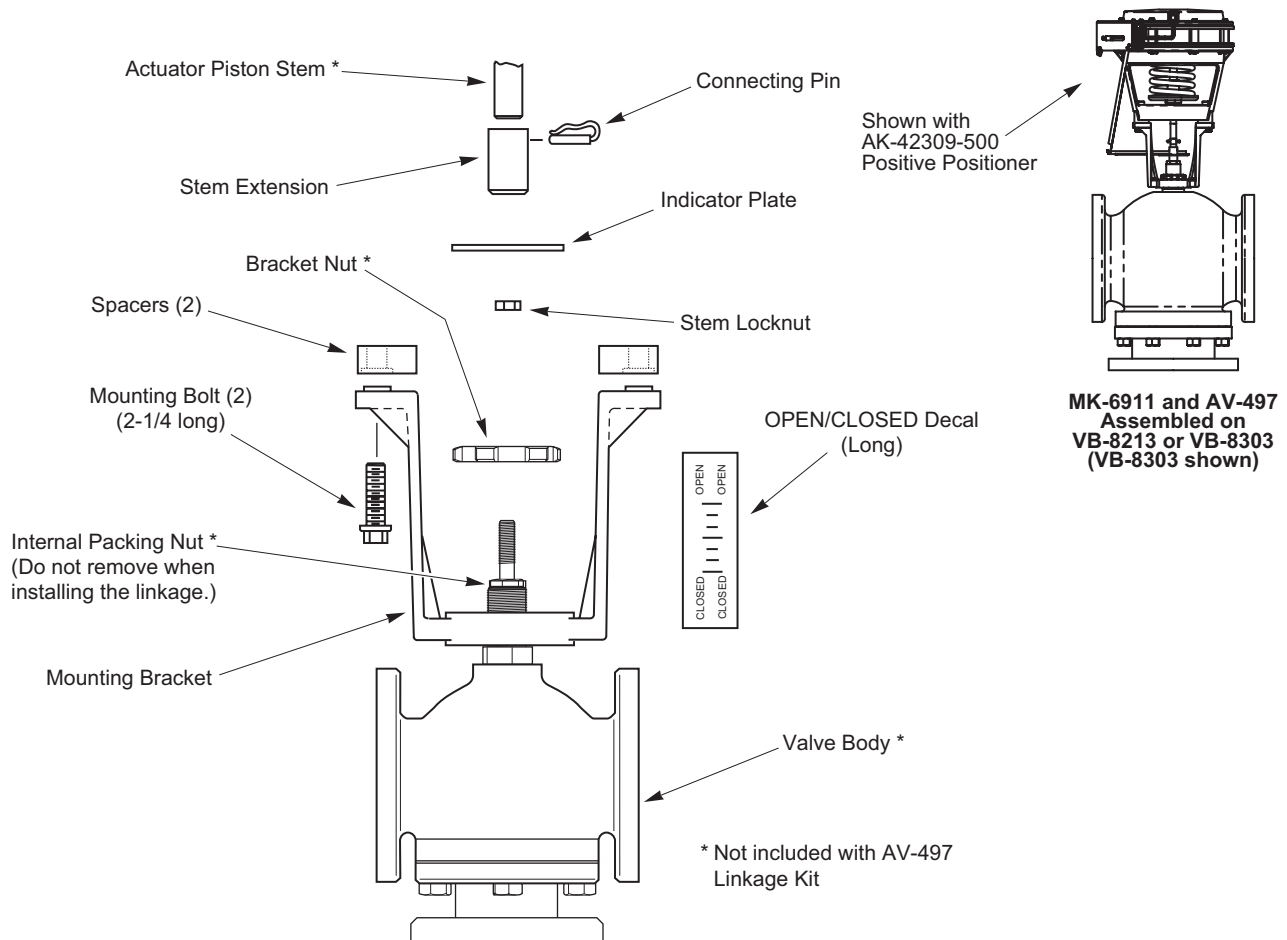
Valve Linkage Assembly for MK-6911 Actuator on 6" VB-8213 or VB-8303 Valve.
